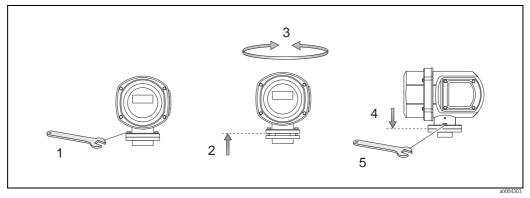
Turning the transmitter housing (stainless steel field housing)
